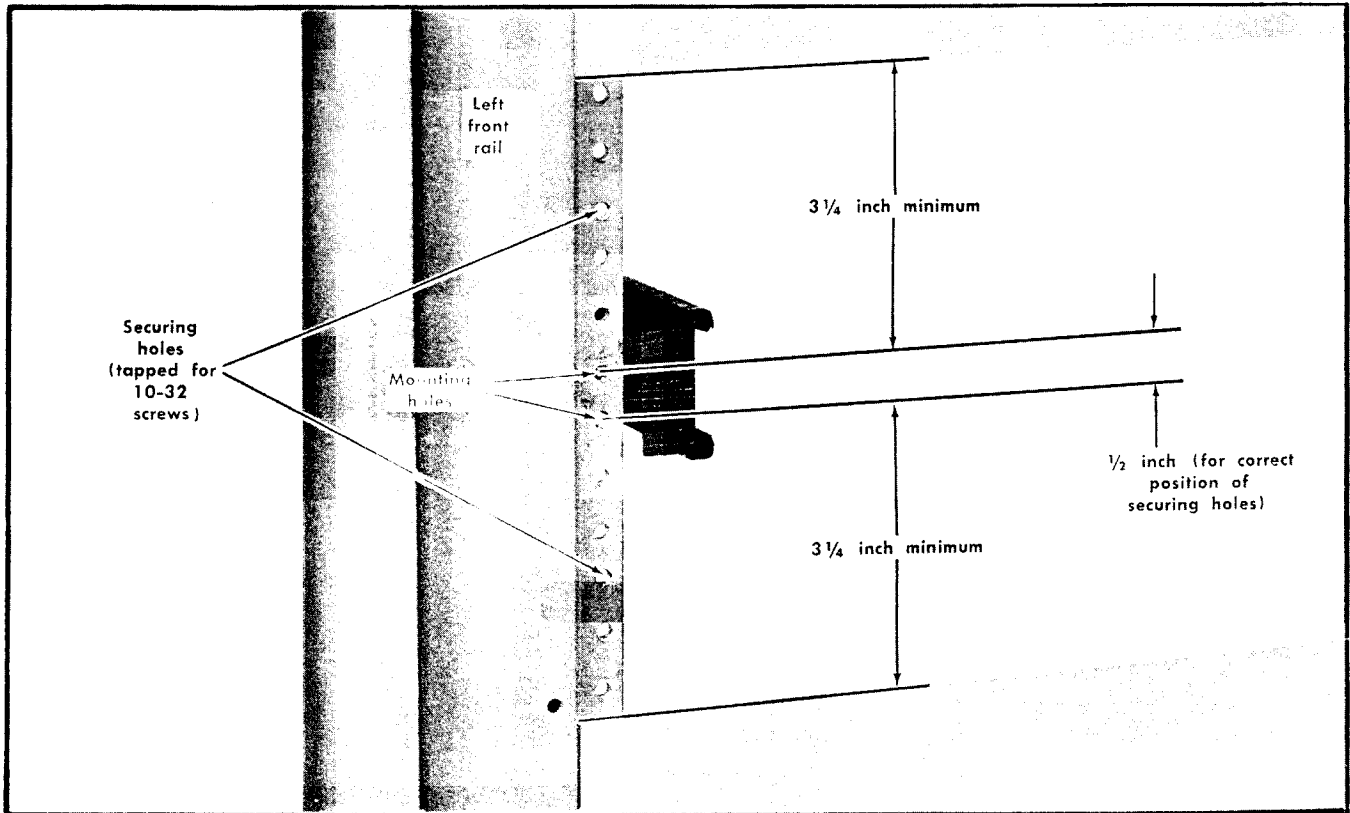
Locating the mounting holes for the stationary sections. Same dimensions apply to right stationary section.
